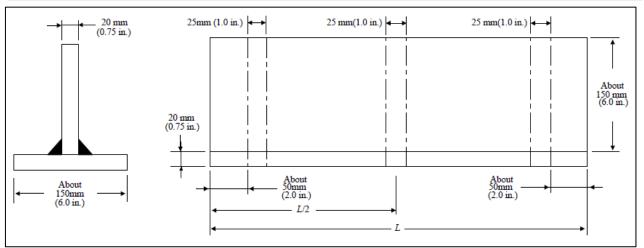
Fillet-Weld Test Assembly
